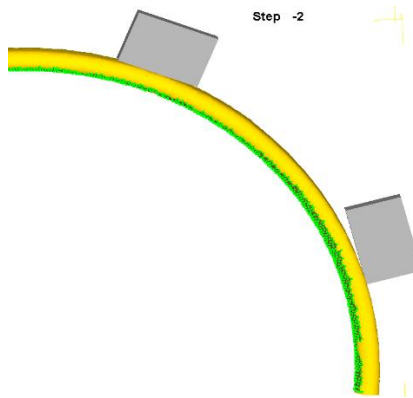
Help tools to maintain contact b/w work piece and rotating wheel.
